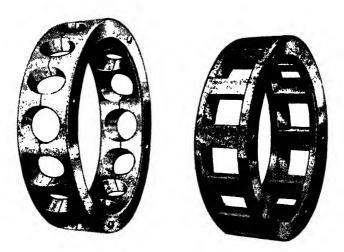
R AND M. TWO-PART CAGES FOR RADIAL BALL BEARINGS AND PARALLEL ROLLER BEARINGS
